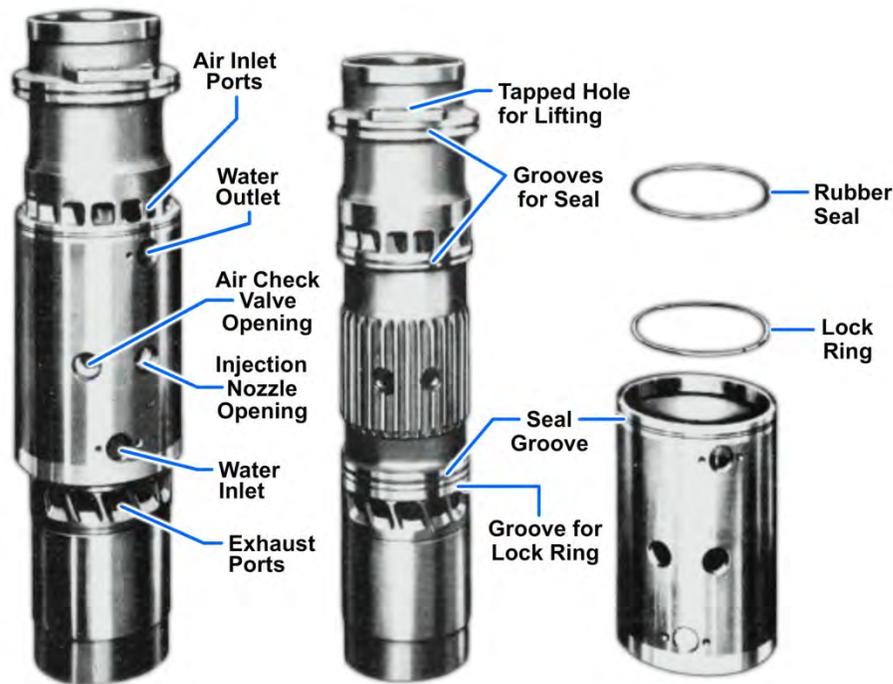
A water-jackets cylinder liner assembly with a sealed-on jacket.
